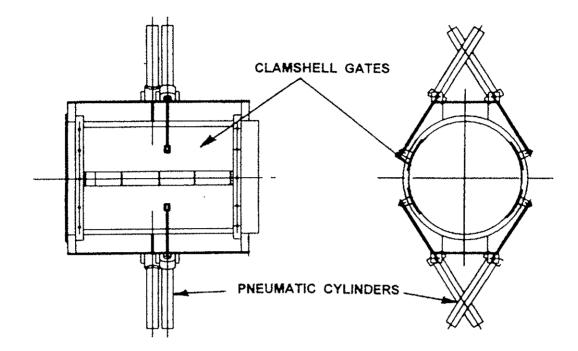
Cross-section of Tail Boom Aft End with Clamshell Gates
